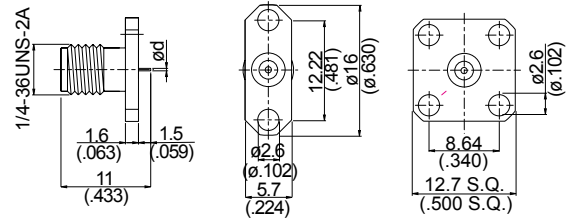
2-hole flange Fig. 2-2: square flange
